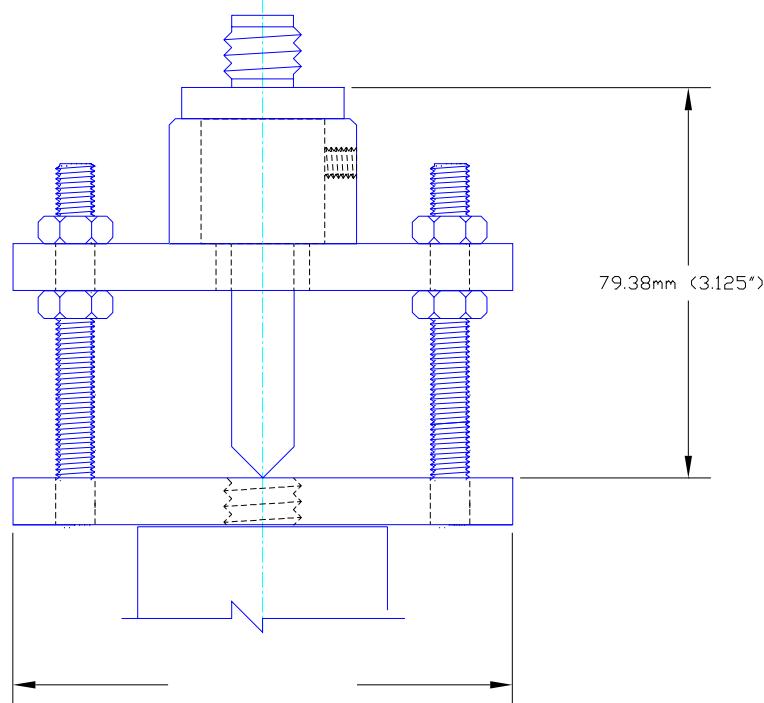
Schematic drawing and dimensions of the 50-cm UNAVCO spike mount called
